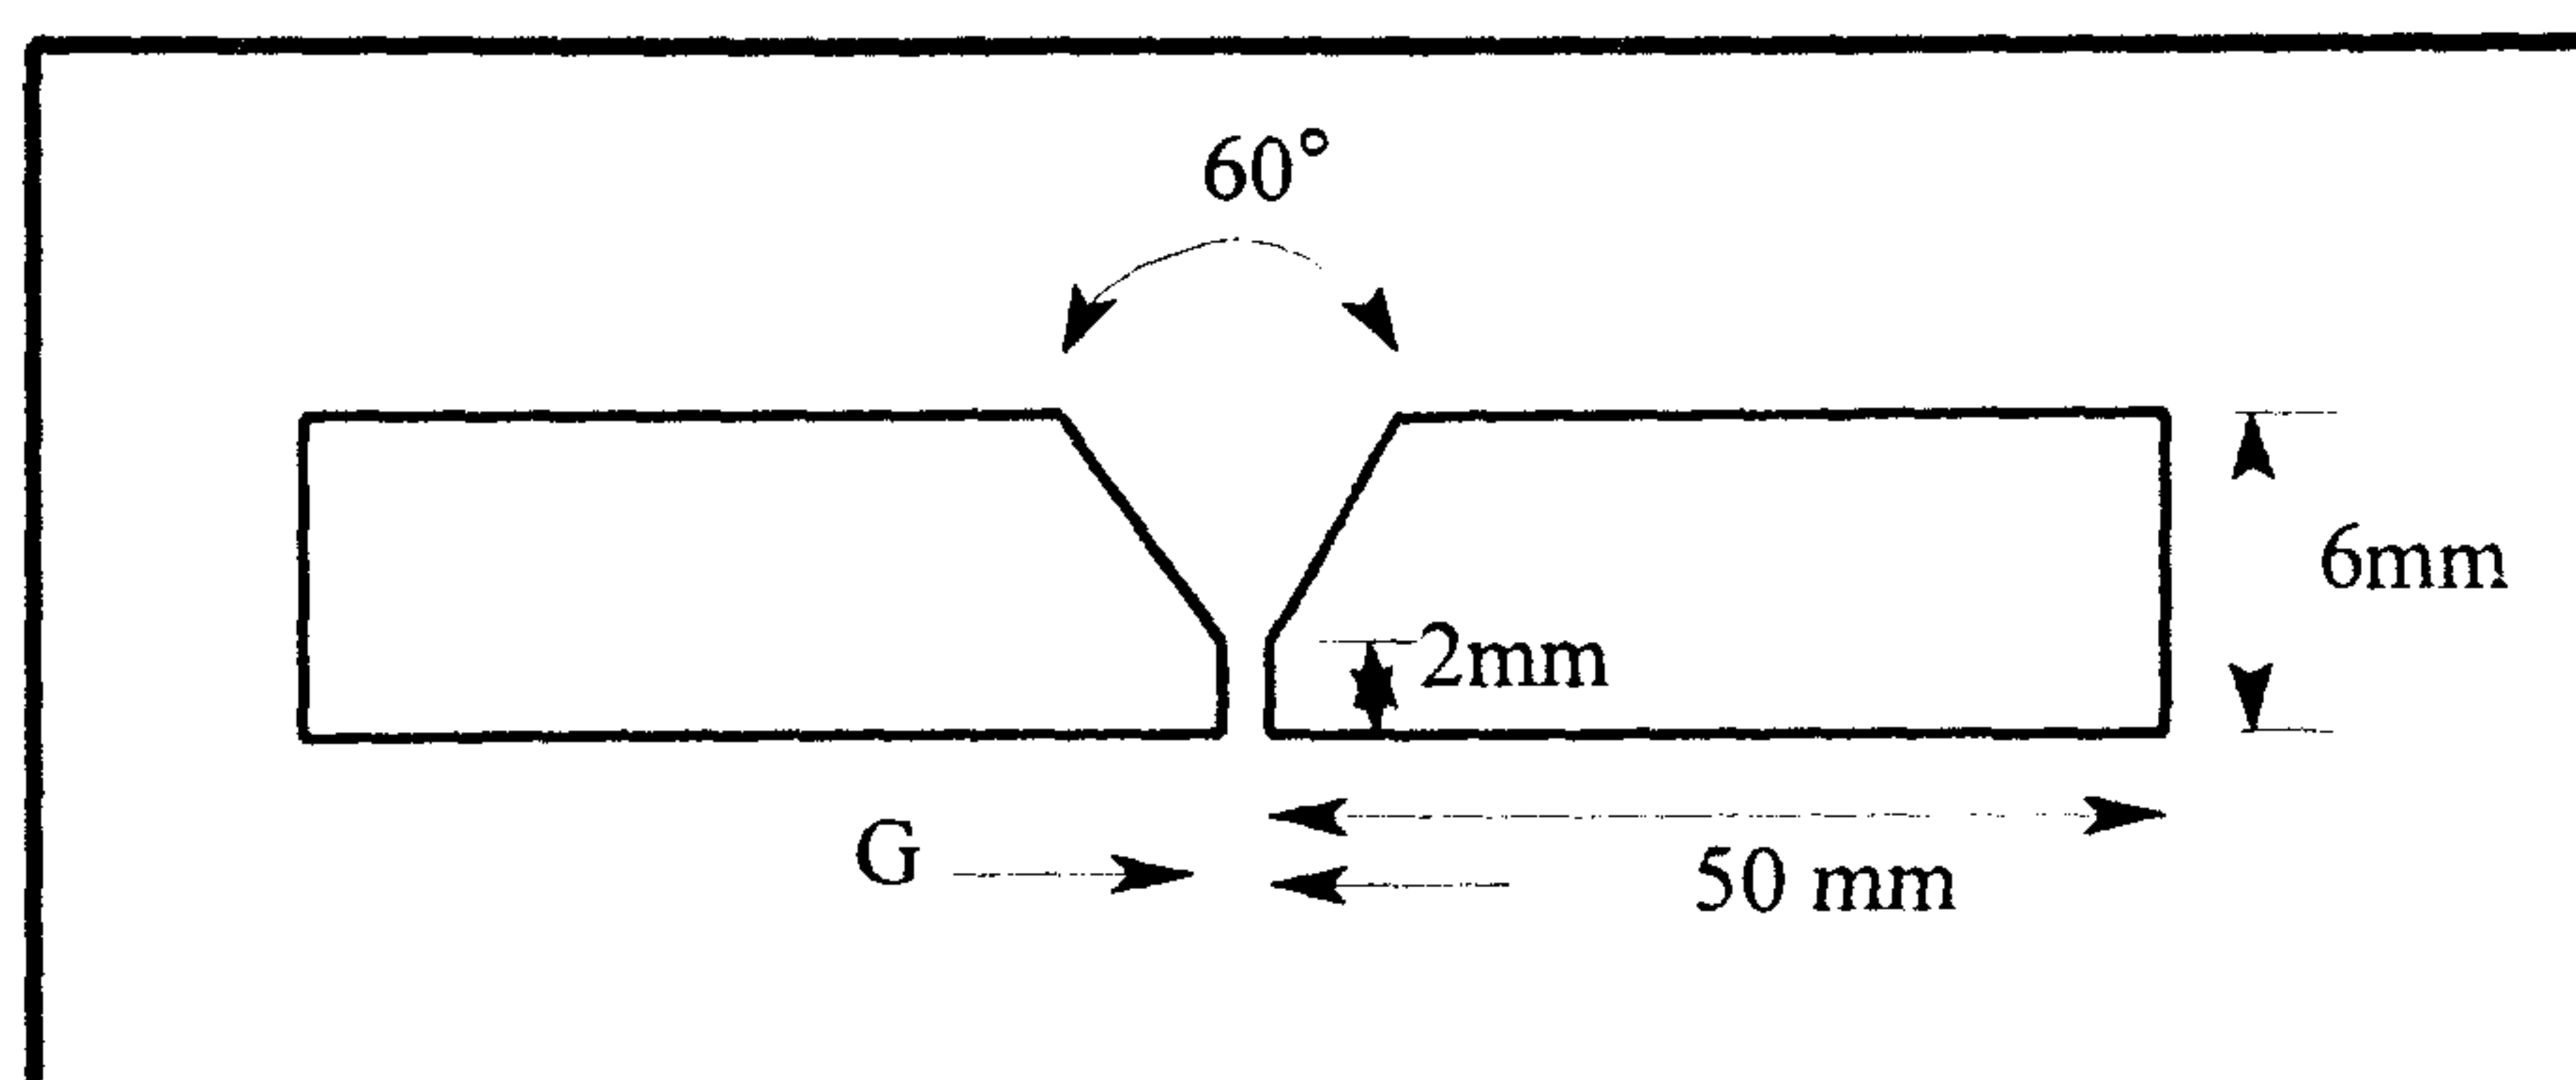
Joint geometry of workpieces  $G = 0$  and  $G = 0-1.5\text{mm}$
